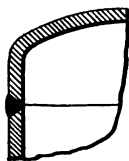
Method of applying cylinder head so that the welding seam will be exposed to tension.
